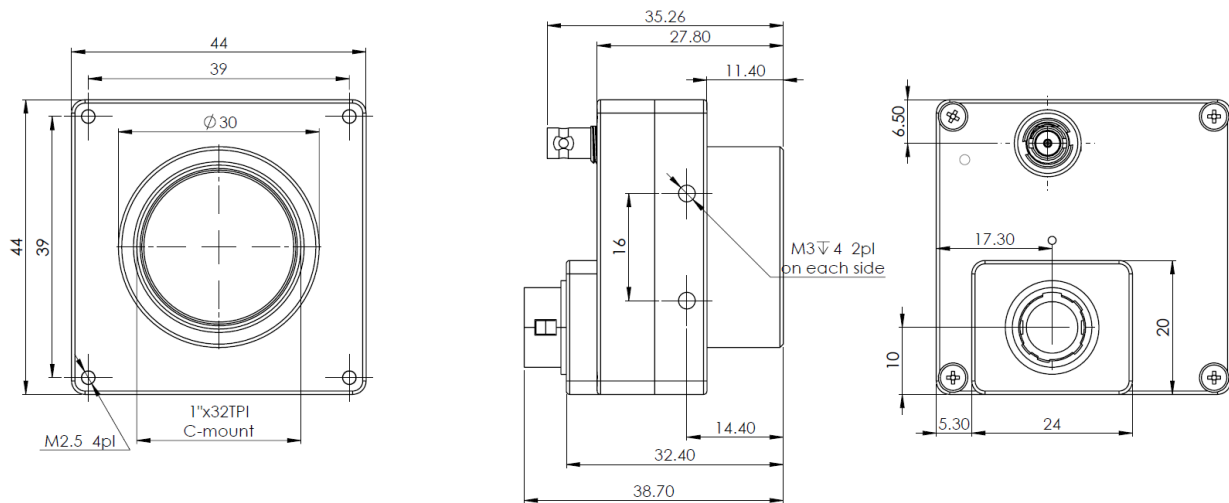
Iron CoaXPress/SDI with GPIO w/o pane-tilt correction mechanical dimensions
